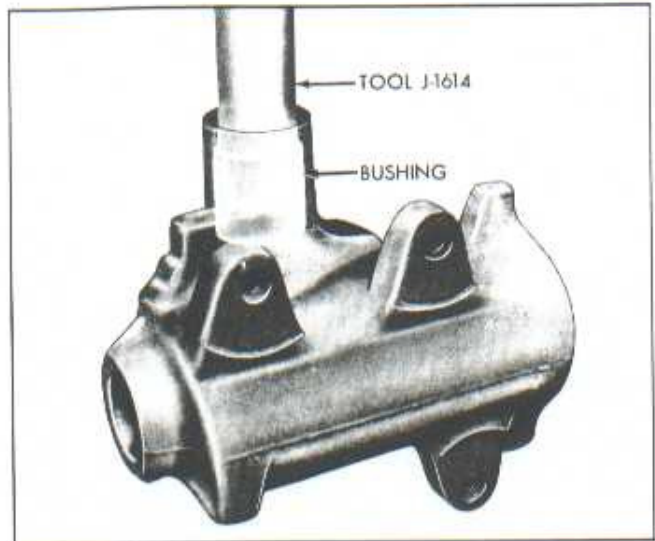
B-8—Removing Pitman Shaft Bushing—Typical
